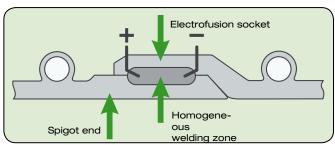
Diagram of electrofusion weld in a socket
